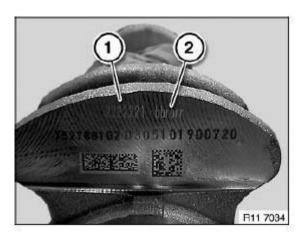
Locating Bearing Shell Courtesy of BMW OF NORTH AMERICA, INC.
